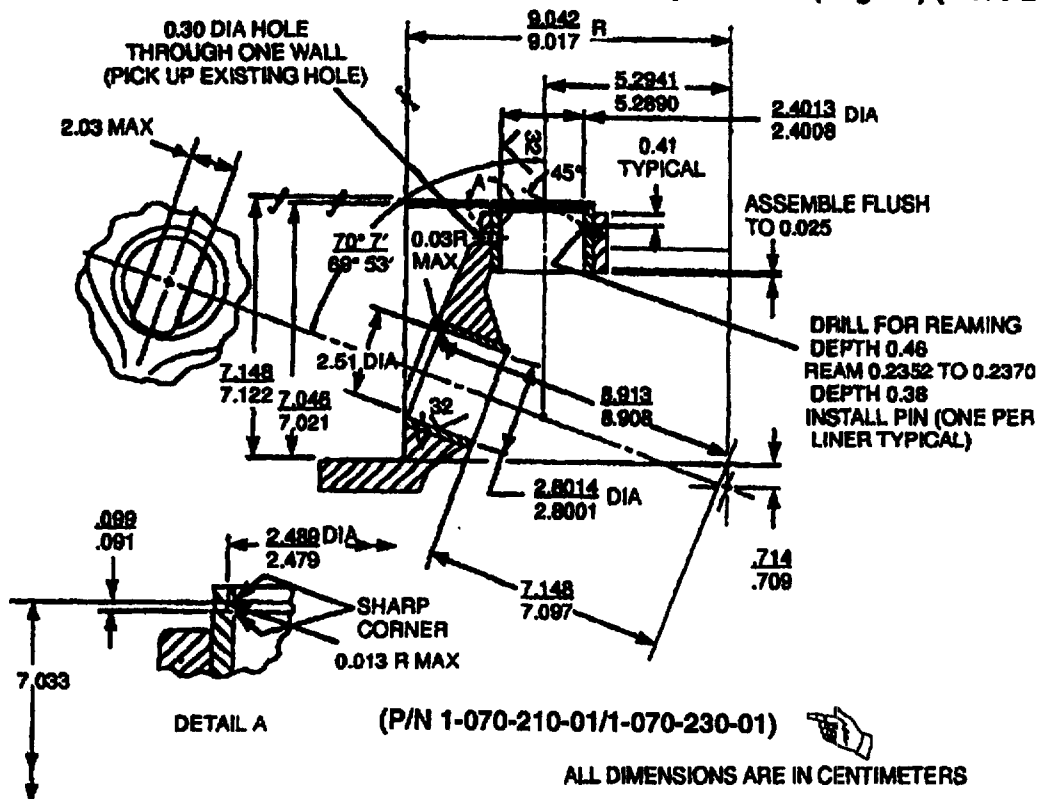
Accessory Drive Carrier - Bearing Liner Replacement (English) (1-070-210-01/1-070-230-01).
